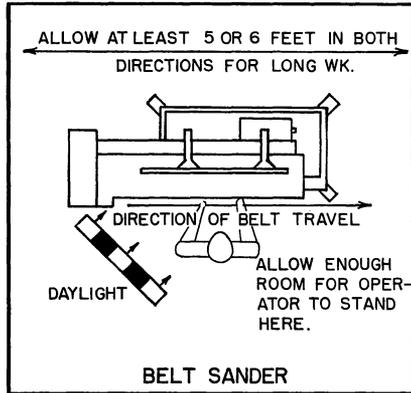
(Courtesy Rockwell Manufacturing Co.)
